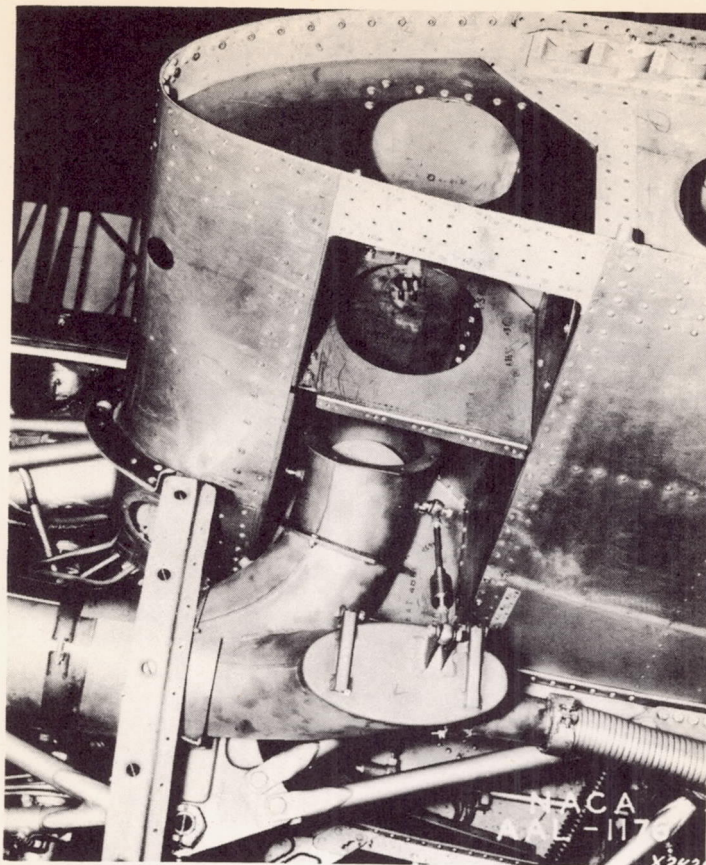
Exhaust tail pipe showing "Y" and valve systems. When the valve over the normal discharge opening closes, a butterfly valve in the elbow opens permitting the exhaust gas to pass through the wing heating tube.
